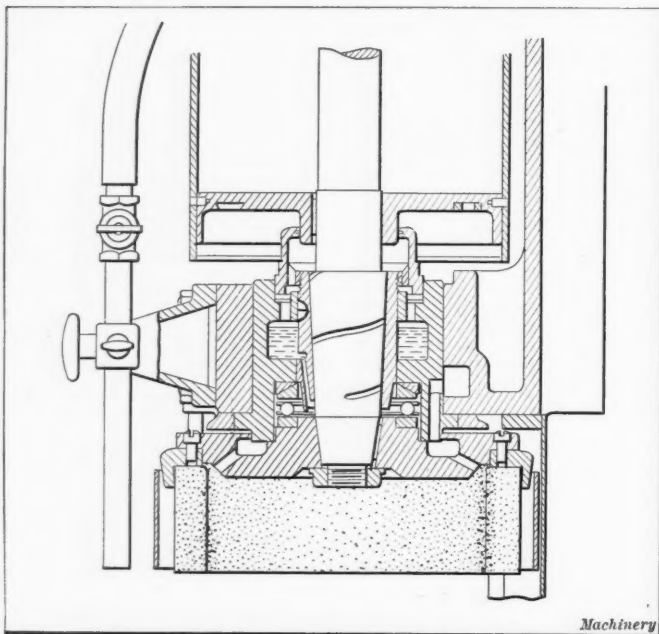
Blanchard Grinder Spindle with Spiral Oil-raising Groove
